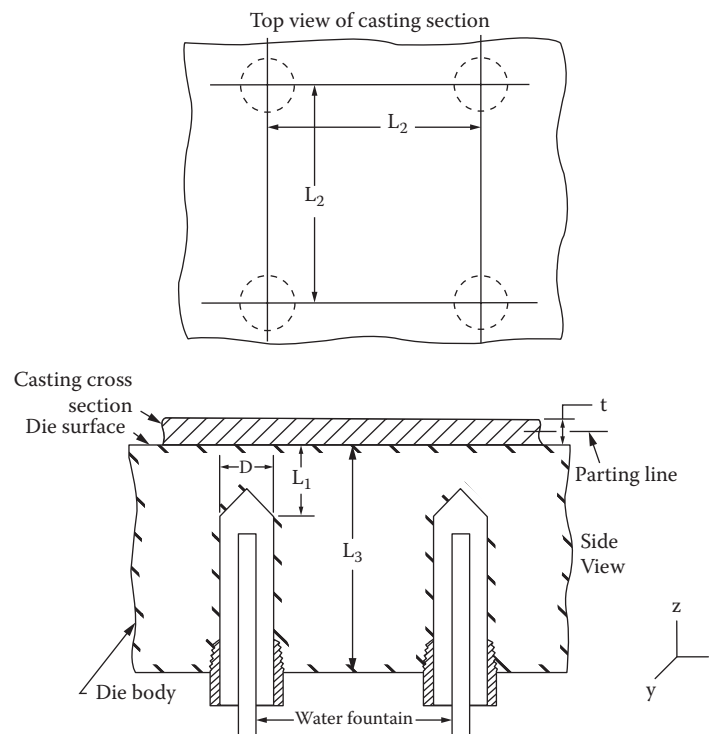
Water fountain configuration used in a die section that produces a casting in the shape of an infinite plate (case 3). Only one-half of the die assembly is shown
